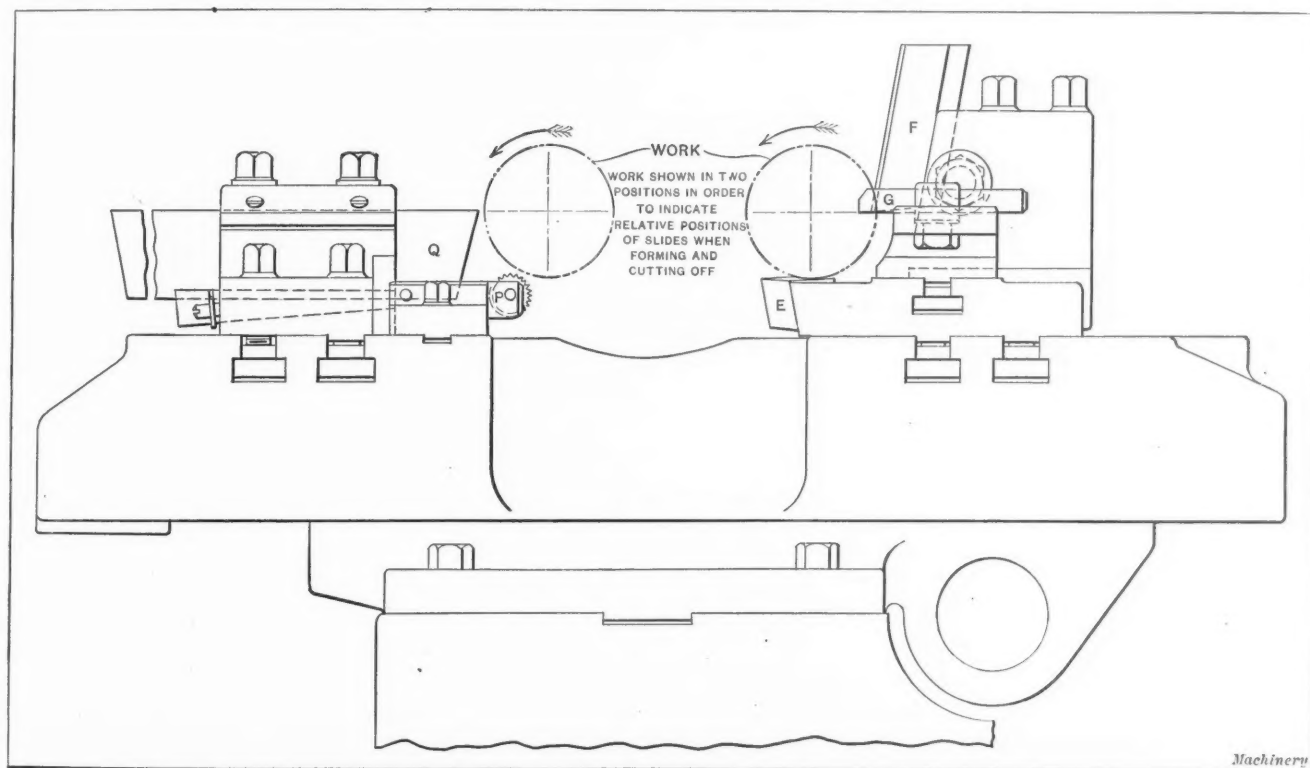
Showing Tools held on the Front and Rear Cross-slides for performing the Knurling, Forming and Cutting-off Operations on the Shrapnel Case
